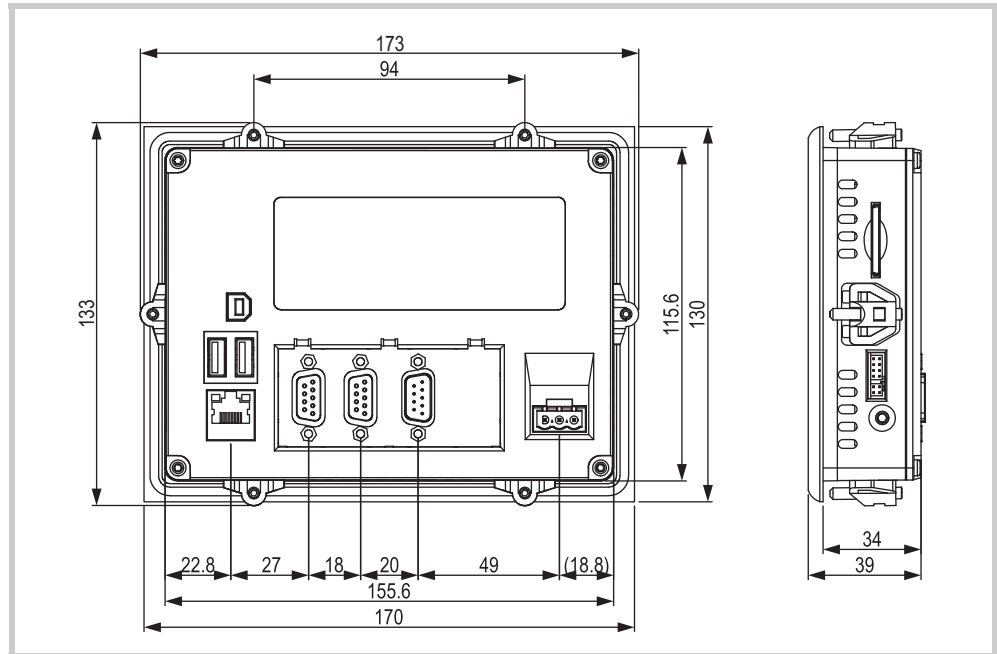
Mechanical dimensions of the 5.7" devices in mm
